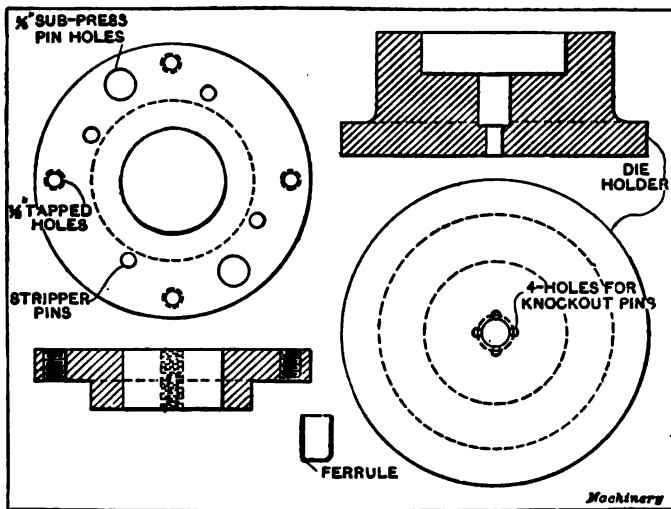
Blanking Punch and Blank Holder. Fig. 23. Die-holder
